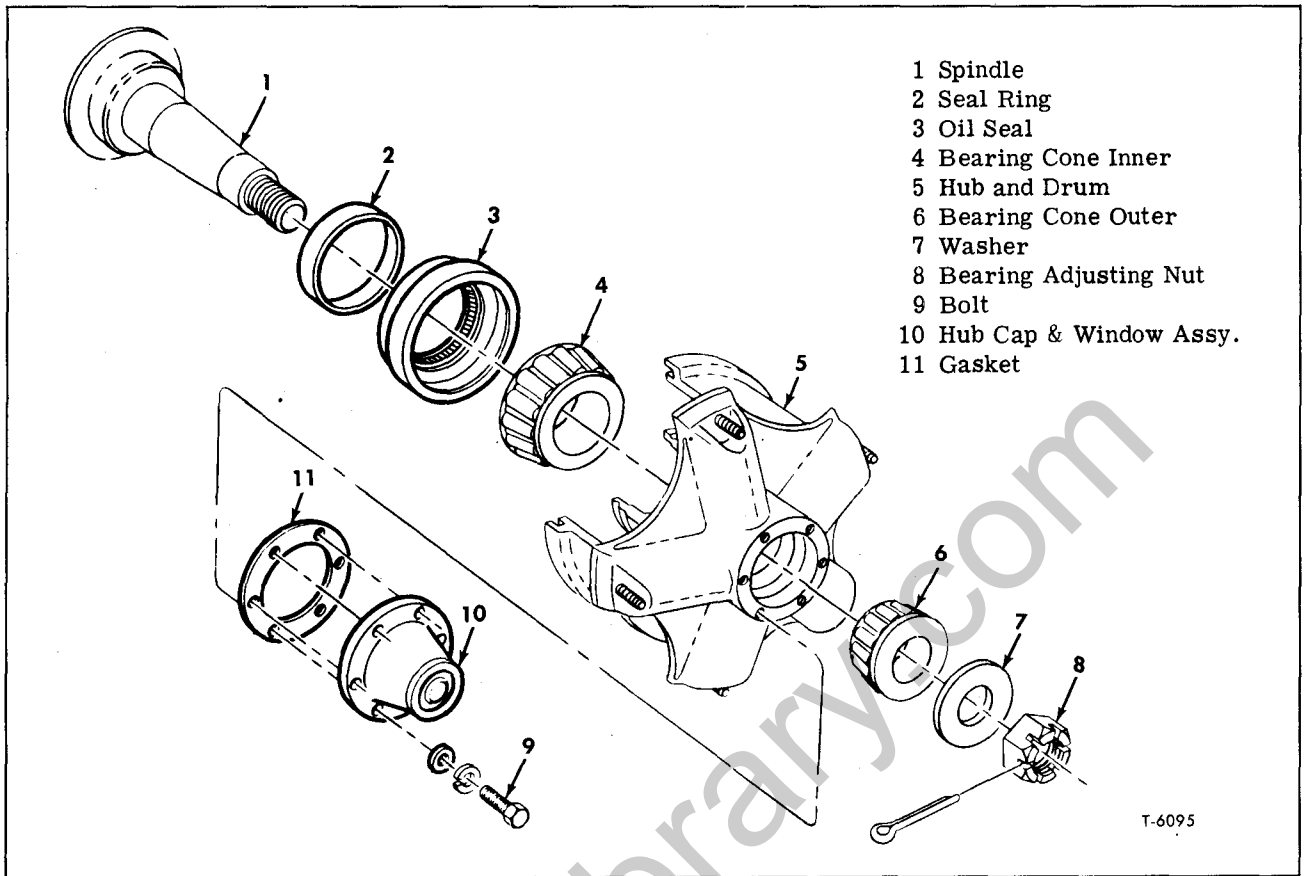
Oil Lubricated Type Wheel Bearing Oil Seal and Components
